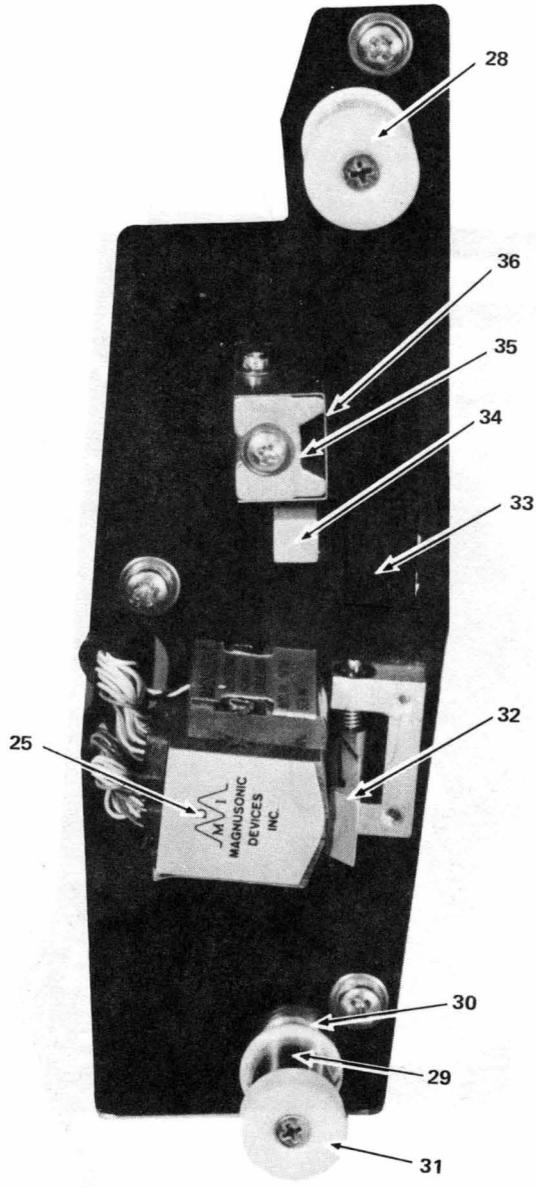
Head Plate Assembly (9020049-01) Parts Location
